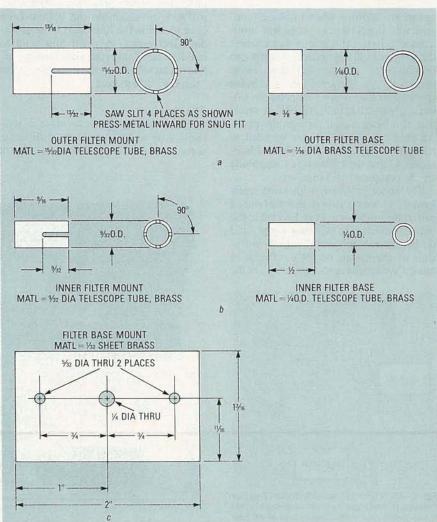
All PARTS OF THE OPTICAL ATTENUATOR are made from brass sheet or tubing. Both the inner and outer filter bases are soldered to the brass mounting plate.
